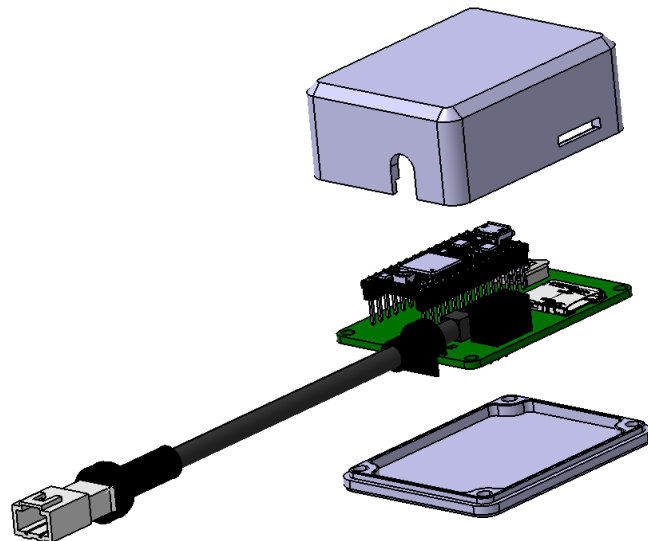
Enclosure & Vehicle Connection Harness CAD
